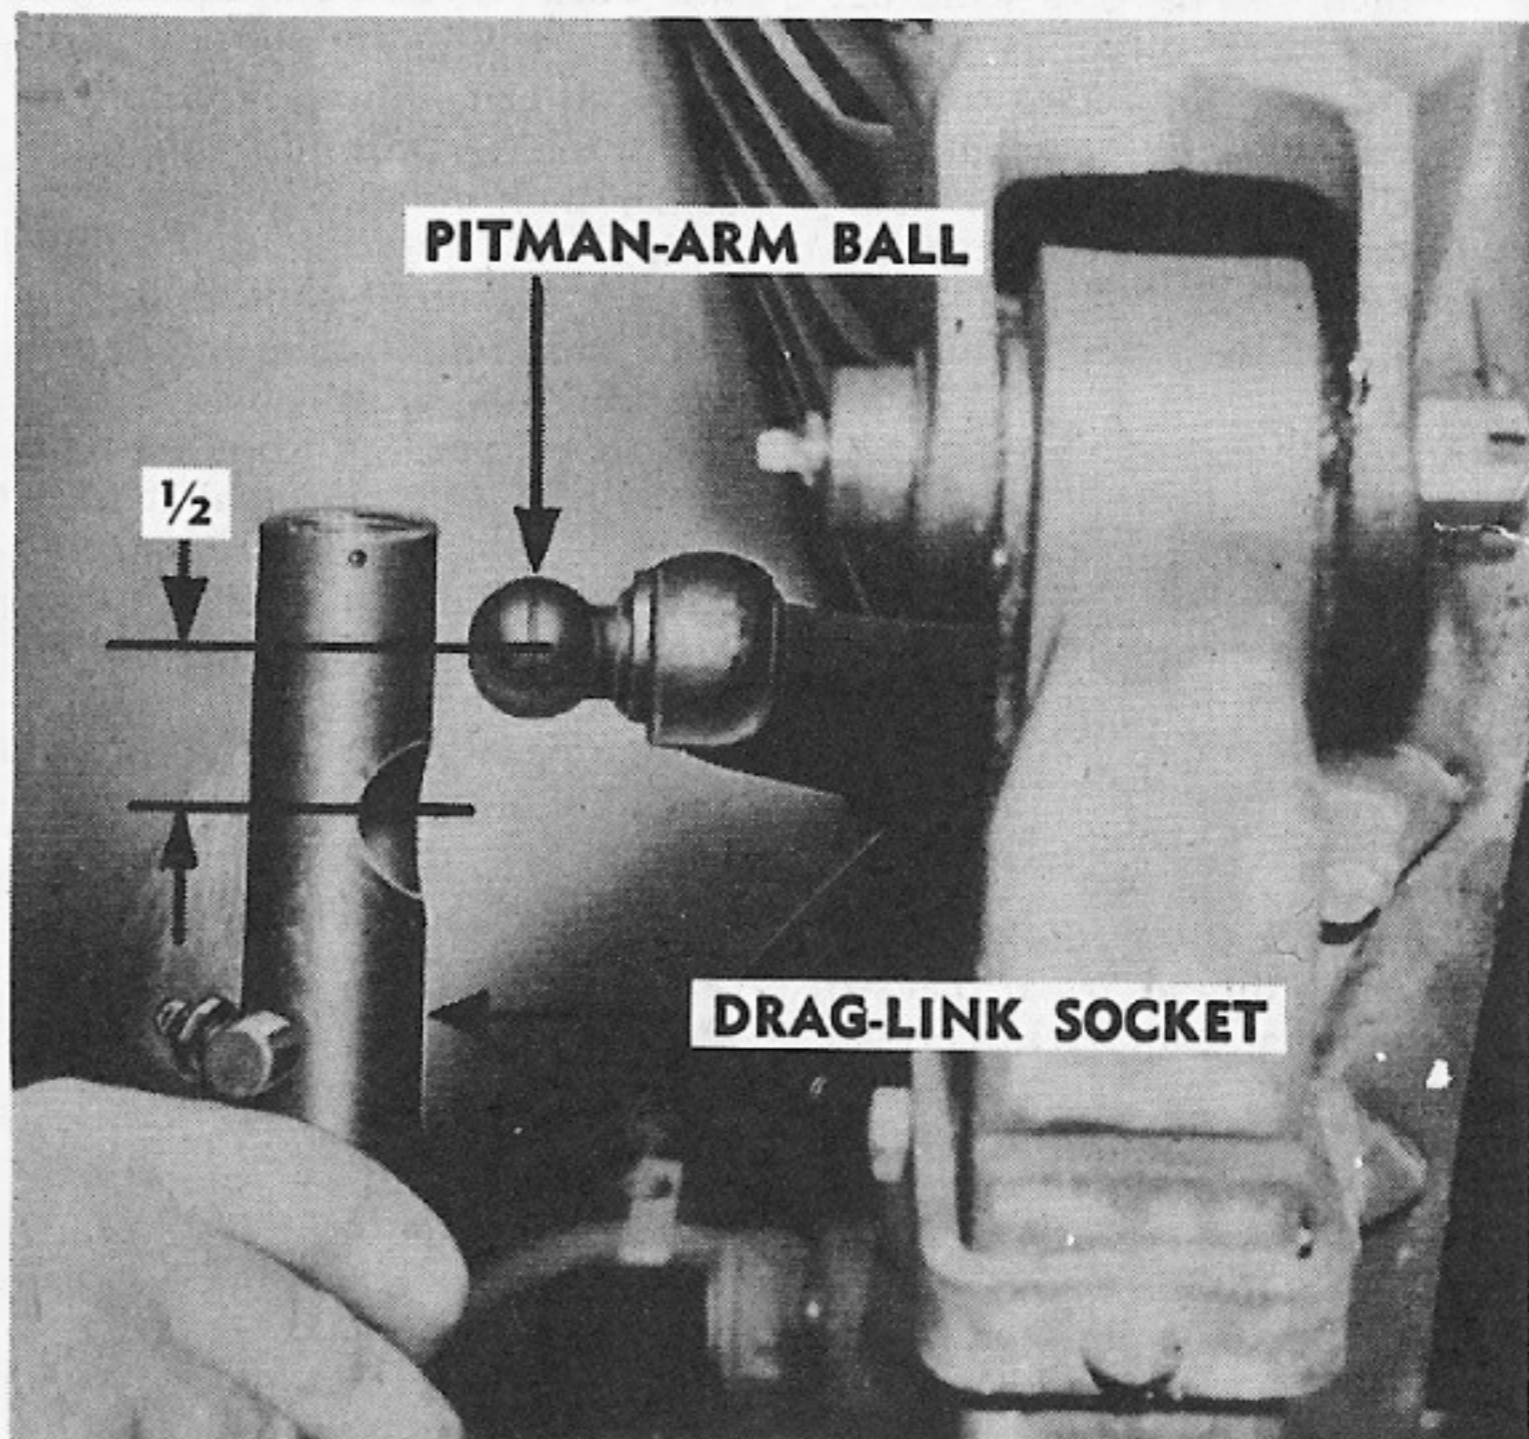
Reverse happens when wheels and steering wheel are turned to extreme right. Ball should be $\frac{1}{2}$ " behind hole.
